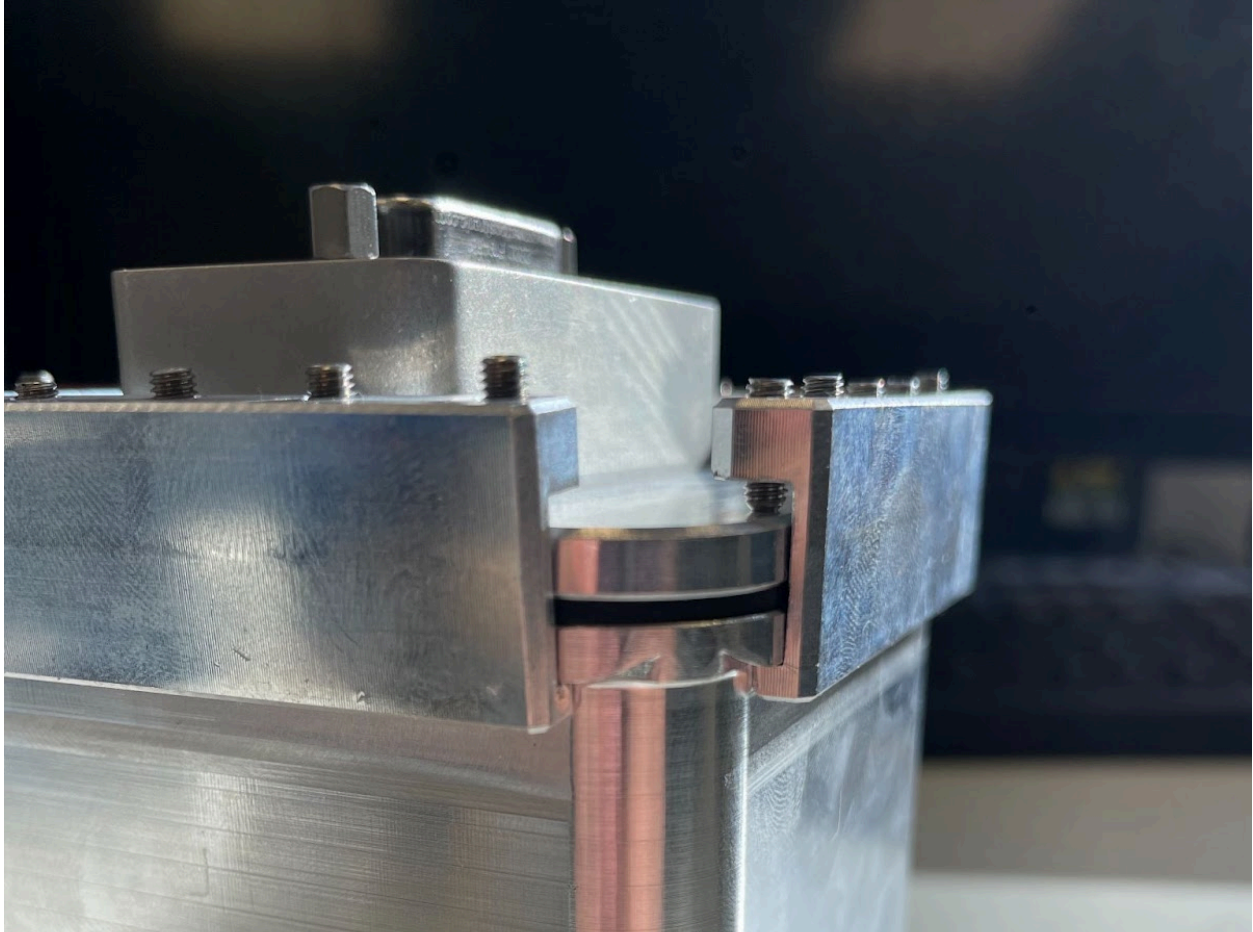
Close-up view of the clamping system. The six clamping screws have been tightened on all sides to secure the lid. The overhang of the sides by the clamping mechanism can be clearly seen.
